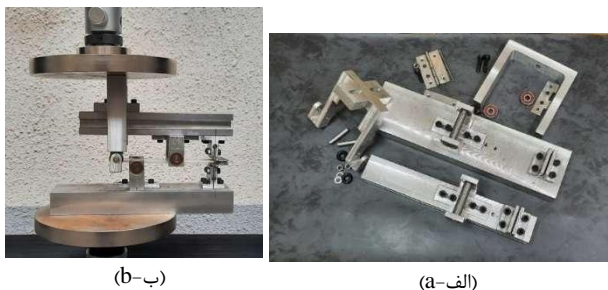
a) and b), the manufactured components of the MMB fixture and its assembly on the tensile testing machine, respectively
